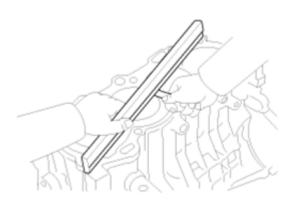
Measuring Surface Contacting Cylinder Head Gasket For Warpage Courtesy of KIA MOTORS AMERICA, INC.
